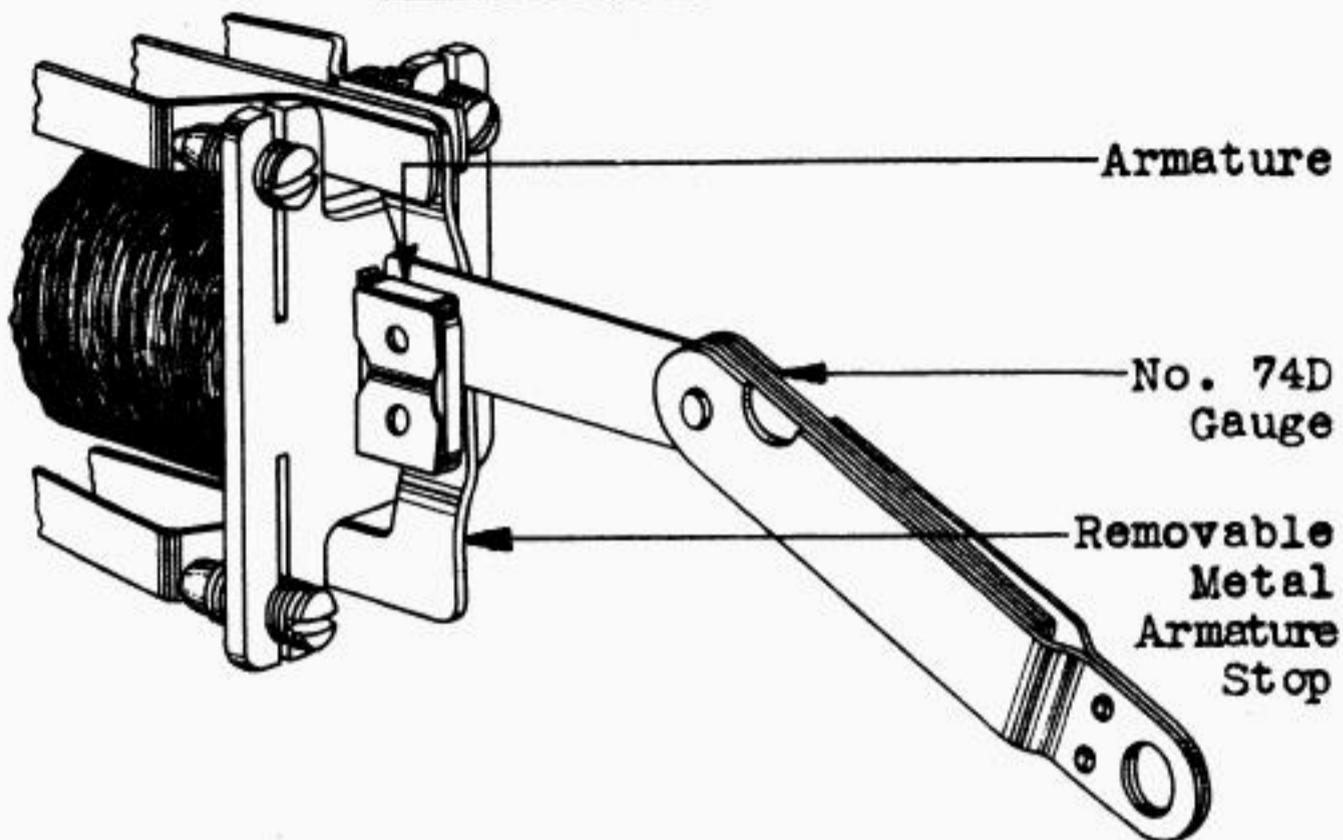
Method of Adjusting for Minimum Front Contact Make on Relays Equipped with a Removable Metal Armature Stop
